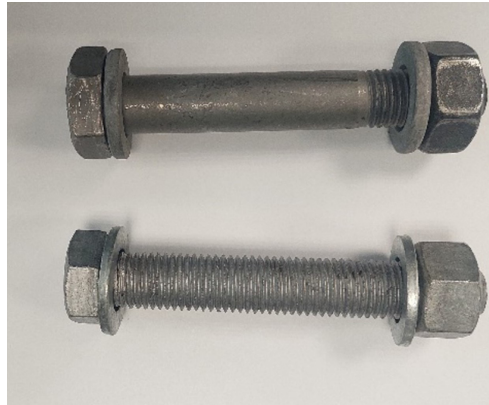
10.9 with partial thread and 8.8 fully threaded bolts
